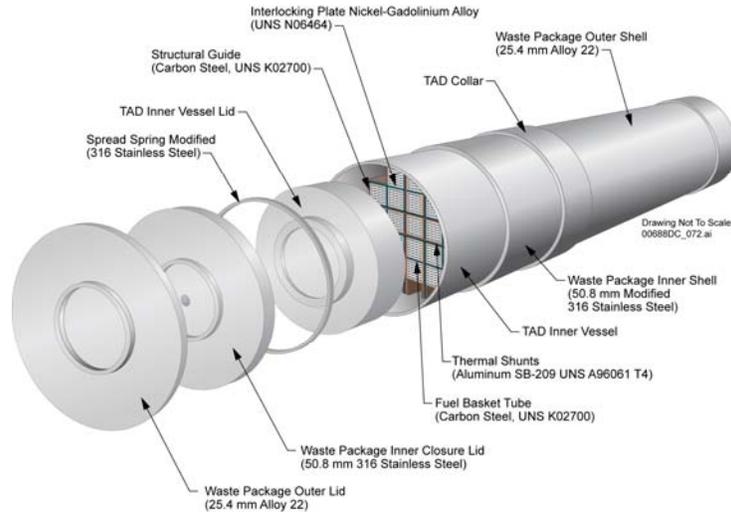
Spent-Nuclear-Fuel (SNF) Container with Criticality-Control Structure (Basket Assembly) for 21-PWR Fuel Assembly.
